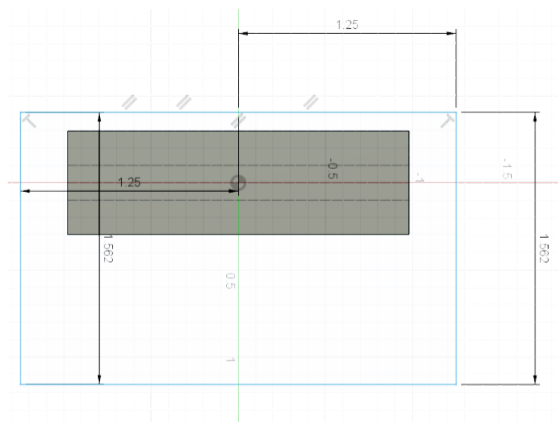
Dimension of the the top section of the slide holder, taken from AutoDesk360.
